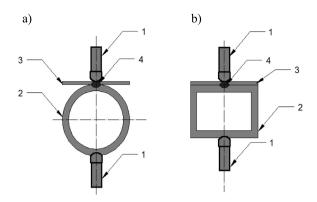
Scheme of welded joints of steel sheets with closed profile: a) sheet – circular cross profile, b) sheet – rectangular cross profile; 1 – welder's electrode, 2 – closed profile, 3 – steel sheet, 4 – weld nugget.
